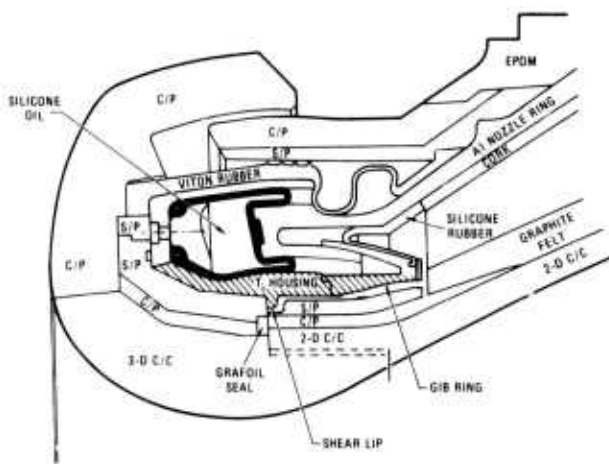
IUS SRM-2 Nozzle and Exit Cone
